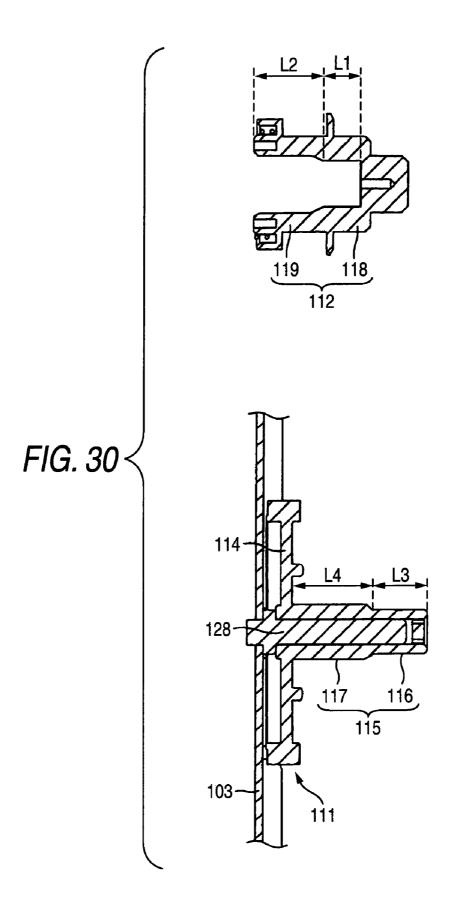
IMAGE FORMING APPARATUS IN WHICH DRIVE TRANSMISSION MEMBER ENGAGES DRIVE INPUT MEMBER
